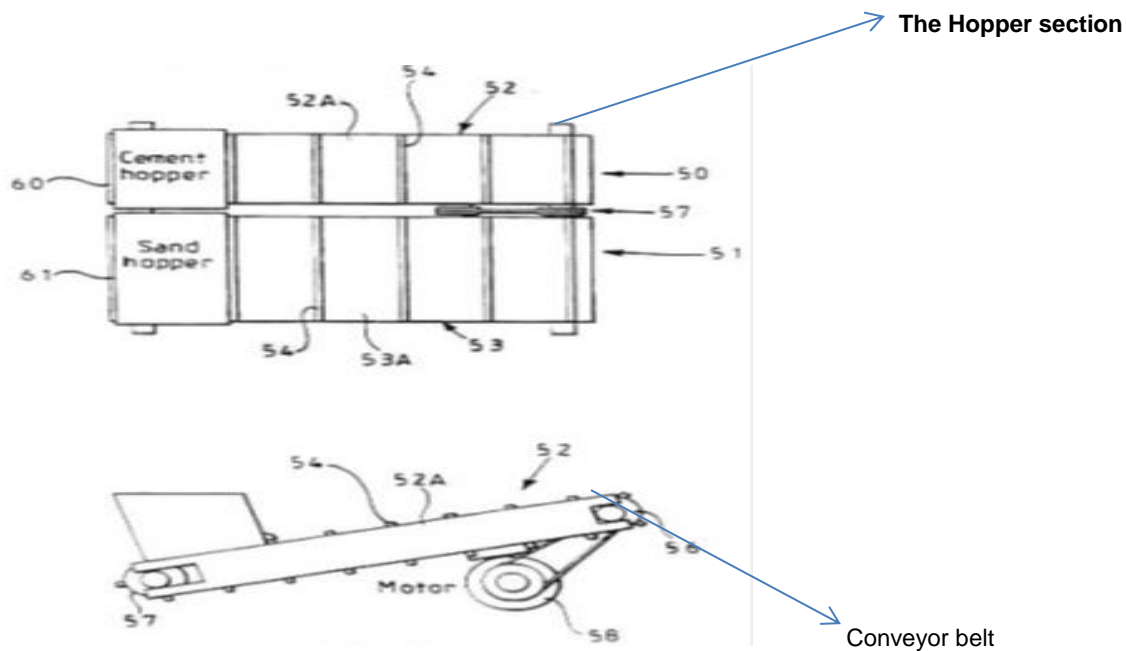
Plan view and side view of the conveyor system arrangement (Patent No. 2330086, 1997)
